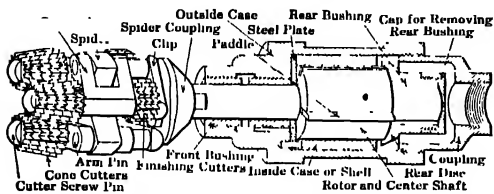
Mechanical Tube Cleaner — Cutter Type.
